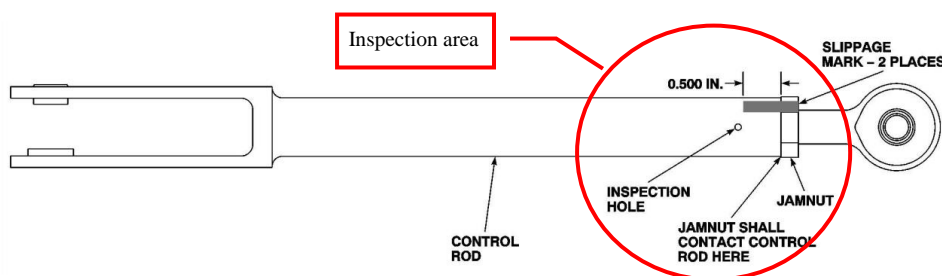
Illustration of push rod assembly to ensure the inspection hole is covered with the thread of rod end bearing
